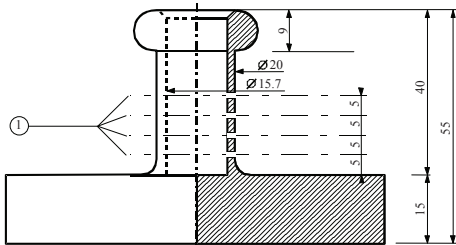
Hollow bronze cylinder, closed at one end; Plan and cut dimensions in mm
